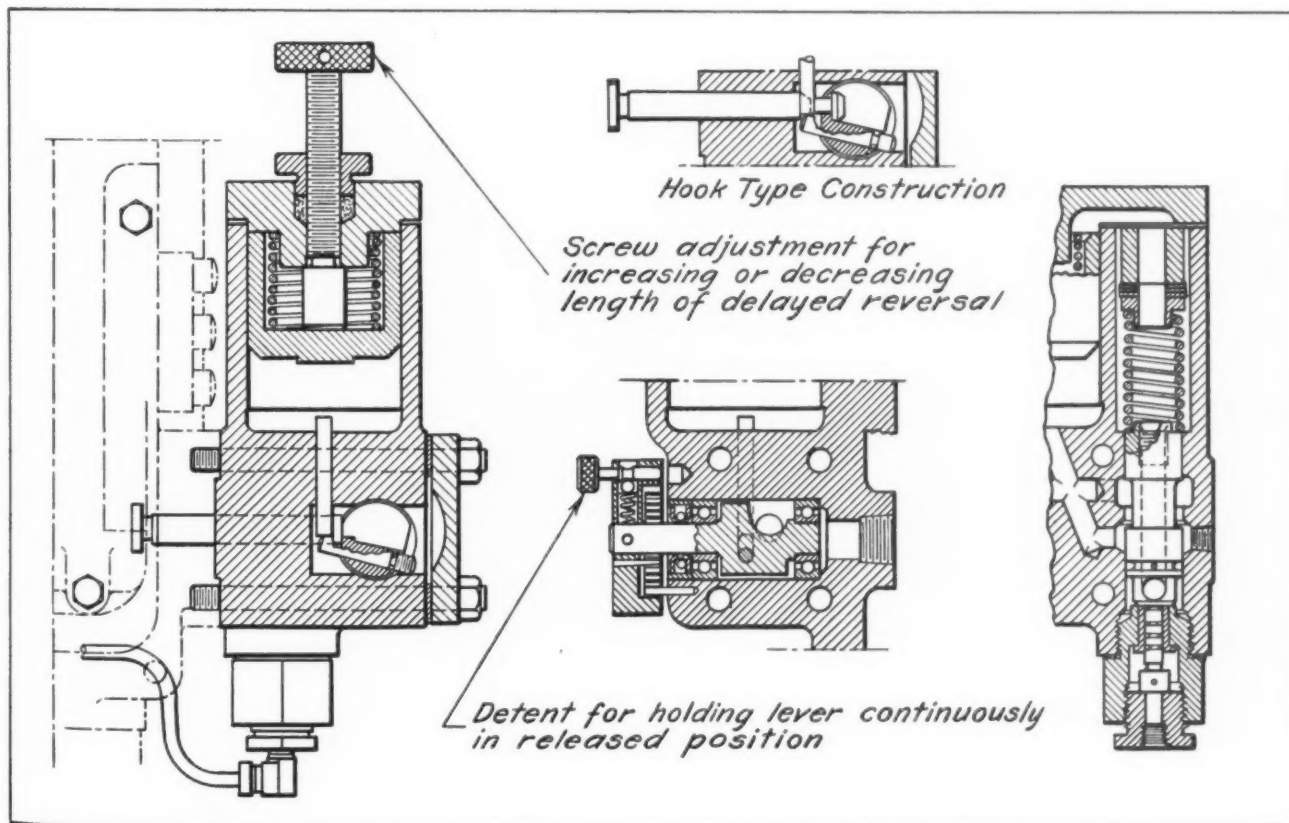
Details of Hydraulic Delayed Reverse Attachment of Unit Shown in Fig. 9
